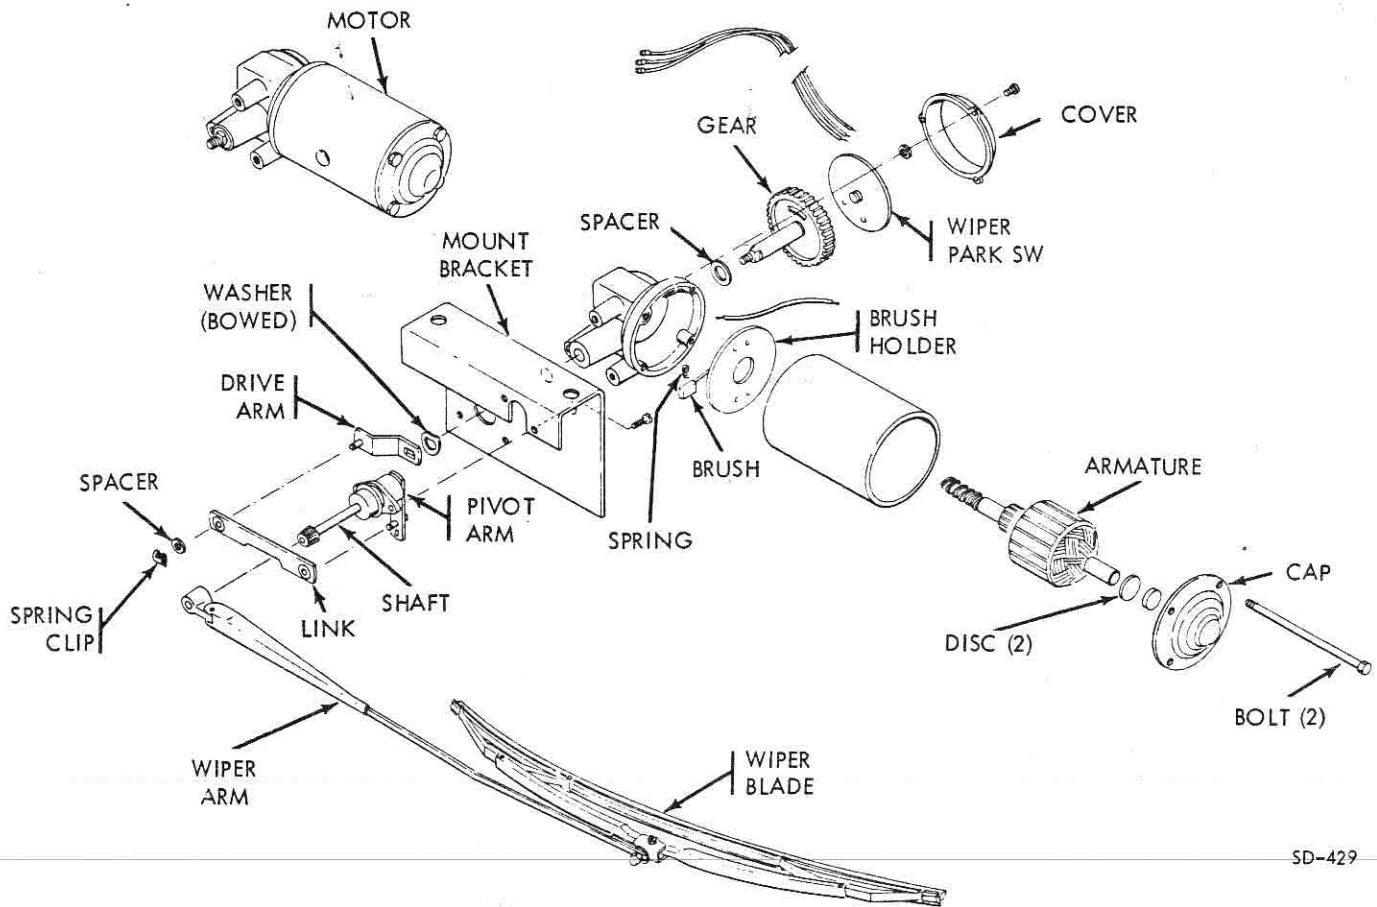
Windshield Wiper Motor, Arm, and Blade
